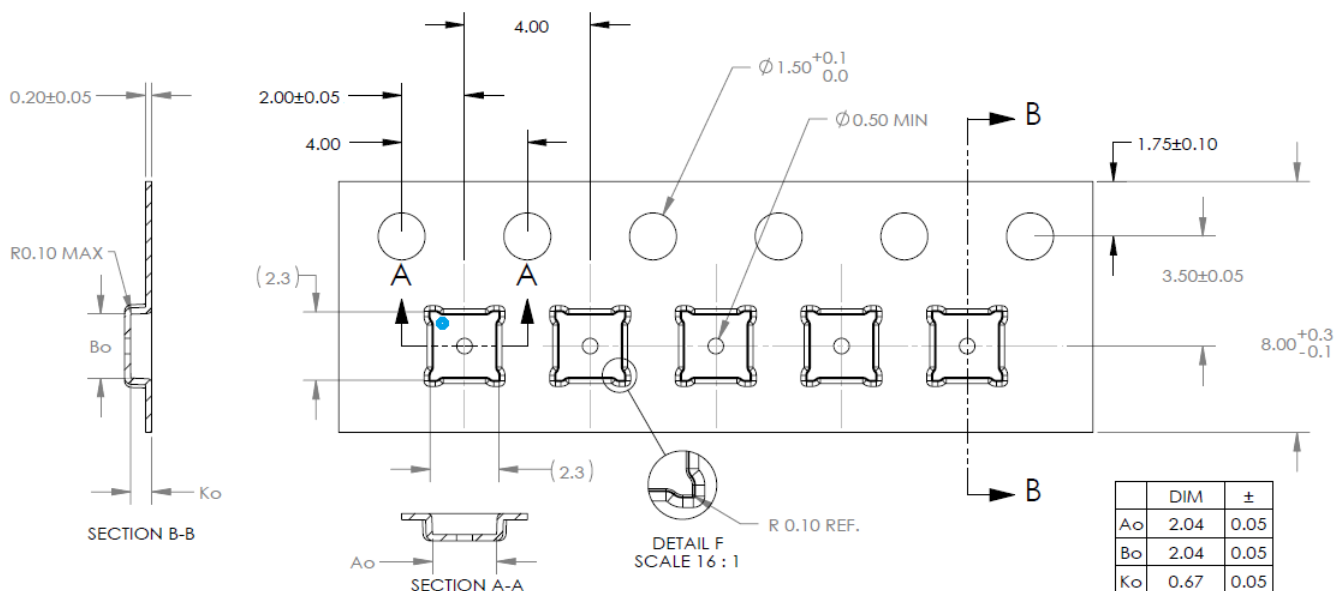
Tape & Reel diagram. Blue dot shows pin A1 orientation on WLCSP tape (All dimensions are in millimetres)
